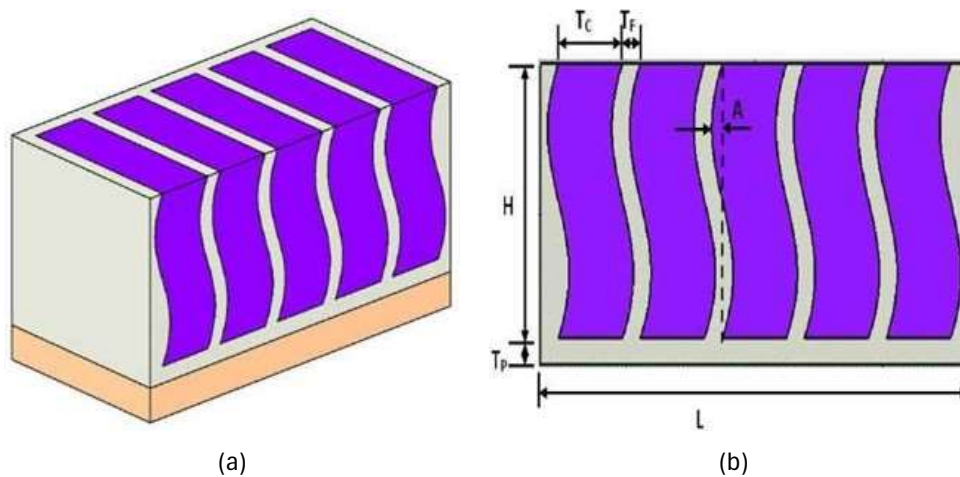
Processor cooling unit (a) Side view (b) Cross-sectional view
